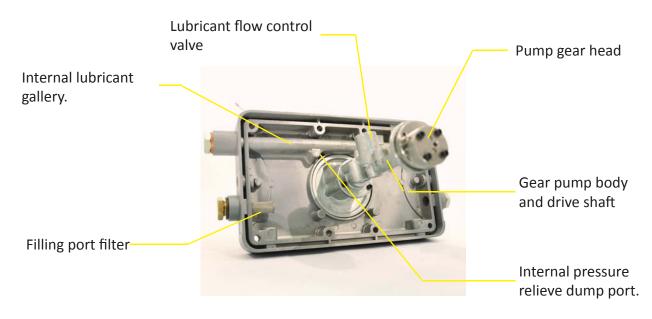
Inside view of electric gear pump filter and main lubricant gallery.
